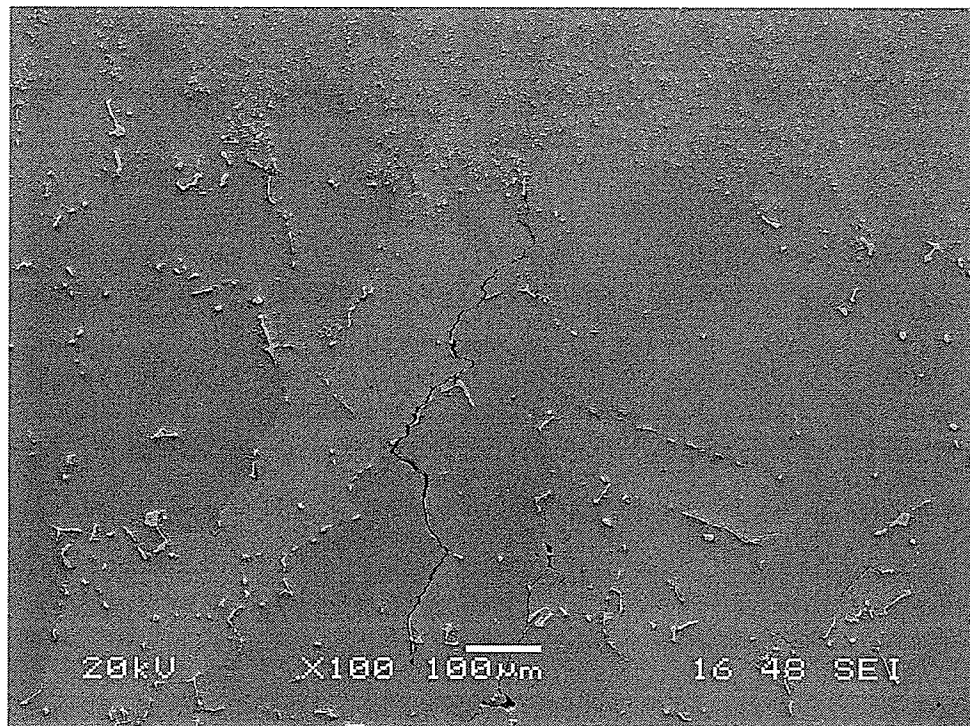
Cracks in the heat affected zone of as-cast Inconel 738 gas tungsten arc welded with Inconel 625 filler. Filler is visible at lower left edge of image.
